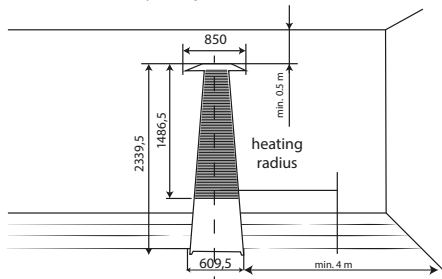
Device dimensions and tolerances (0.5 min)
